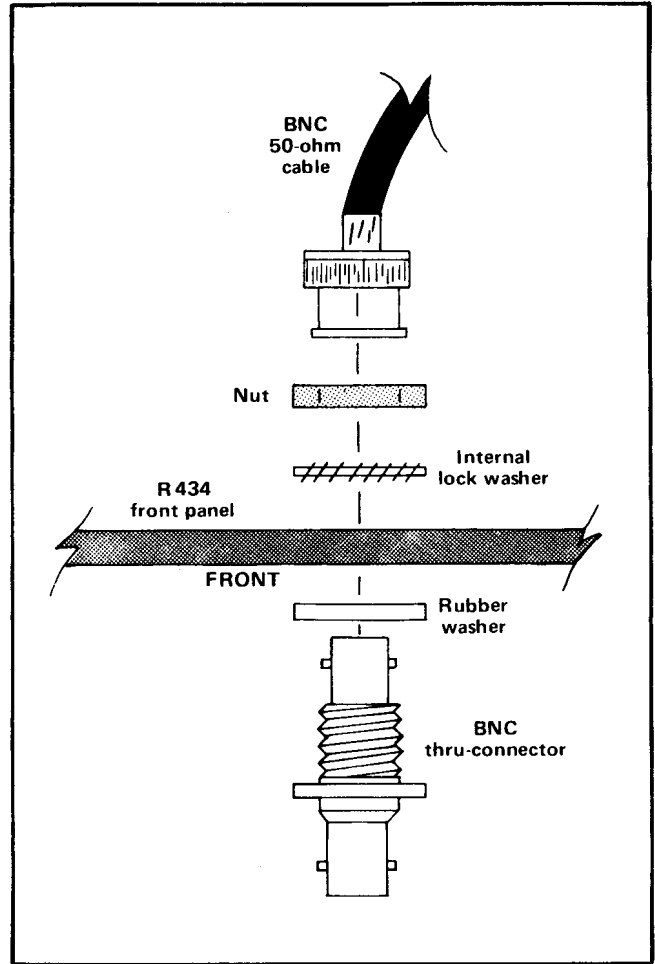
Mounting a chassis-mount BNC thru-connector.
